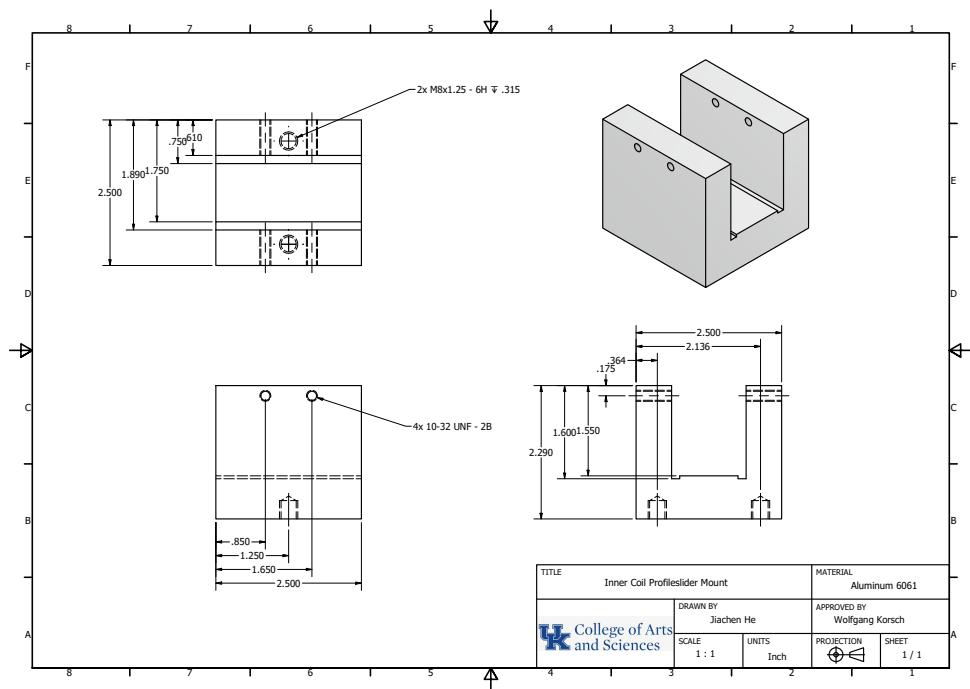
Inner Coil Profile Slider Mount (Material: Aluminum 6061)
